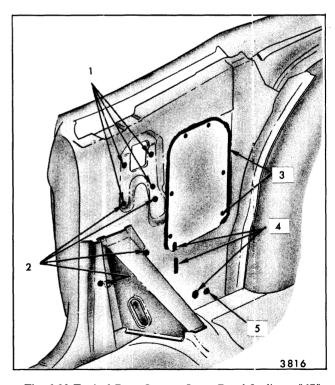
Typical Rear Quarter Inner Panel Sealing - "67" Styles
